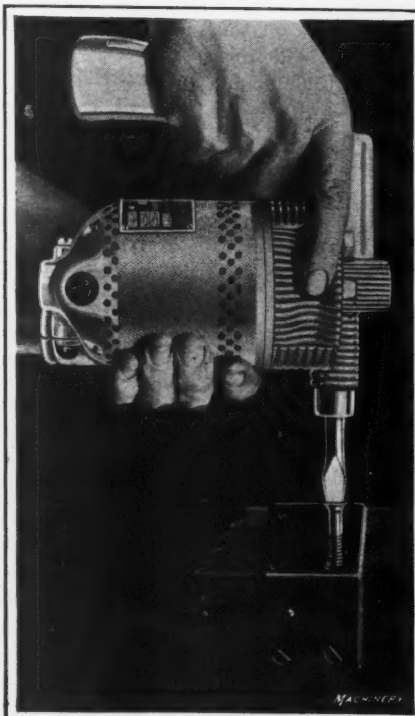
Automatic Electrically Driven Screwdriver sold by George C. McKay
